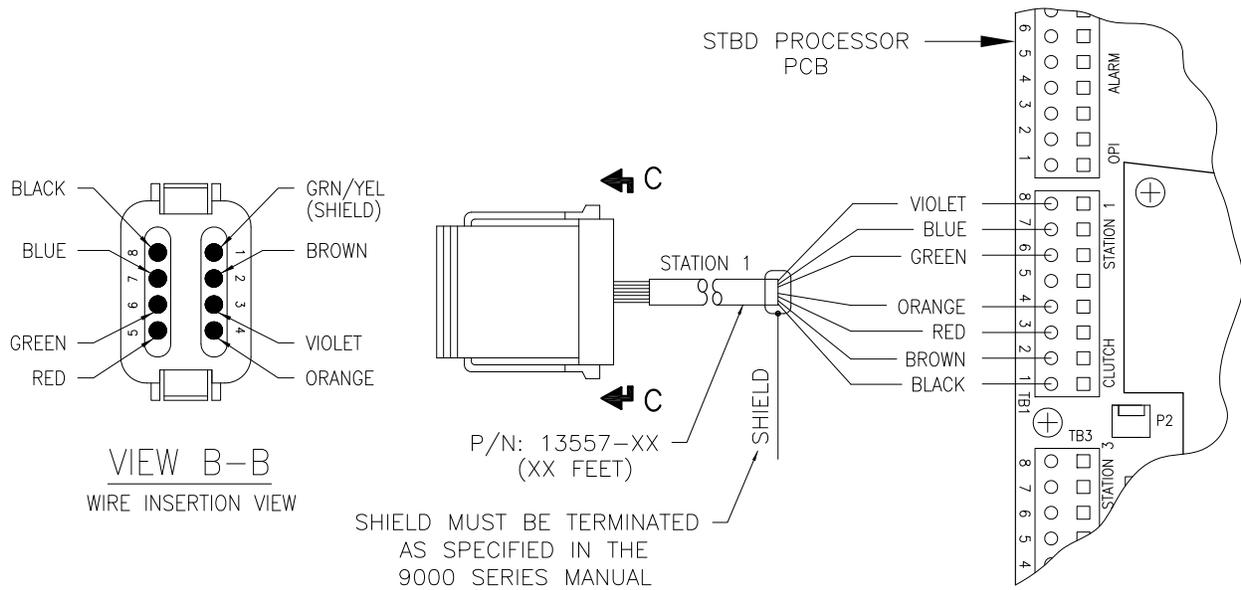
9000 Hard Wired Drawing 14119-2
